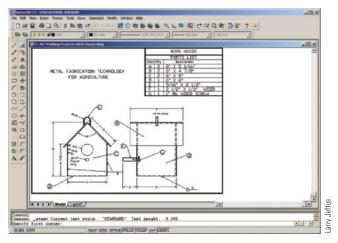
AutoCAD LT drafting program used to design a welded project.
